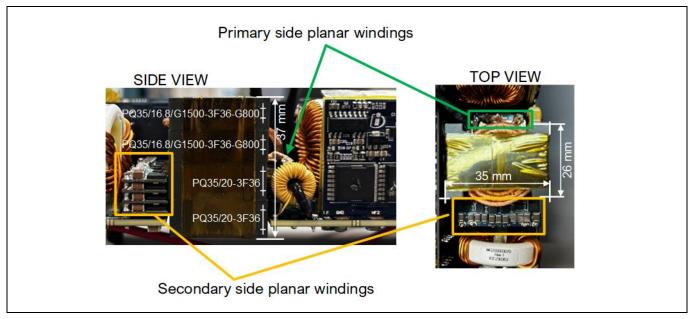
Integrated planar transformer assembly – picture of an assembled prototype
